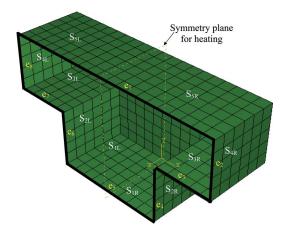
FE model of the lower part of the assembly showing edges and the feasible heating region
